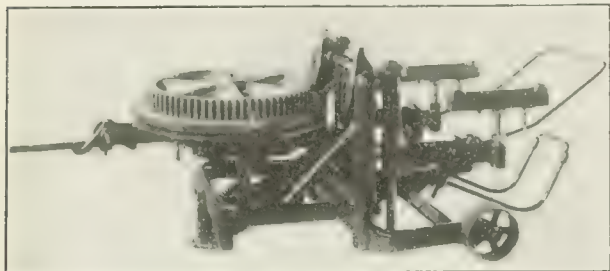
Rock-over Molding Machine built by Henry E. Pridmore, Chicago, Ill.
